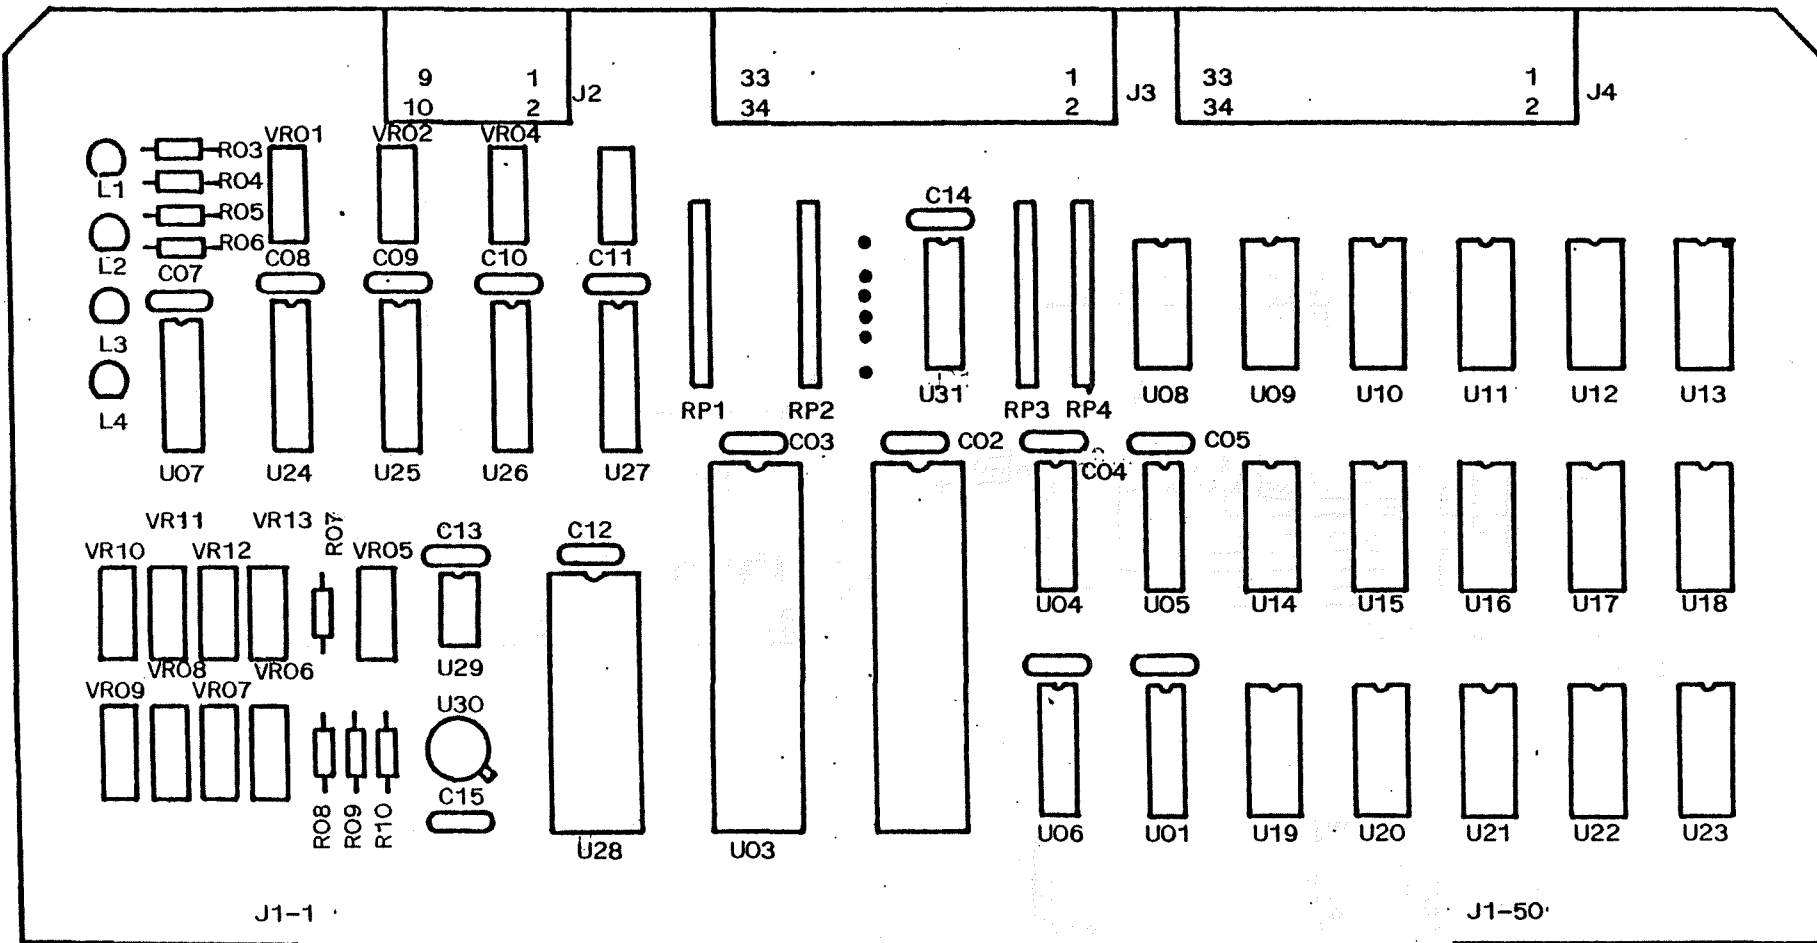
The Printed Wiring Assembly of the I/O Board
